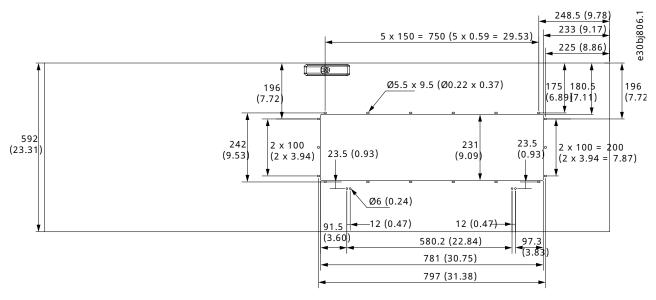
Dimensions for the Cut-out on the Cabinet Door in mm, Dual-pump Cabinet
